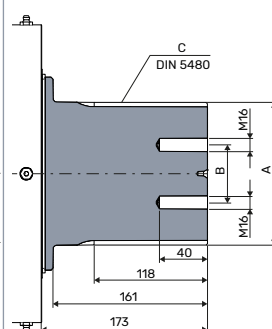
Dimensions of the shaft types 4A and 4B. Shaft W150 / W180.
